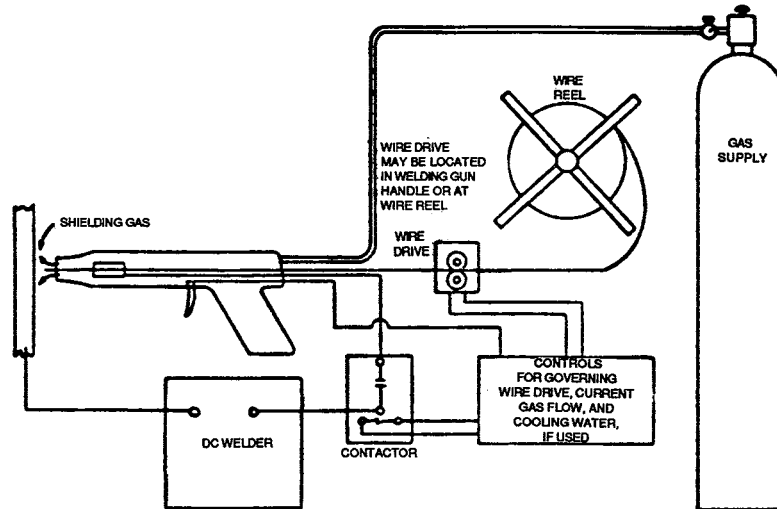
Schematic diagram of gas metal-arc welding
